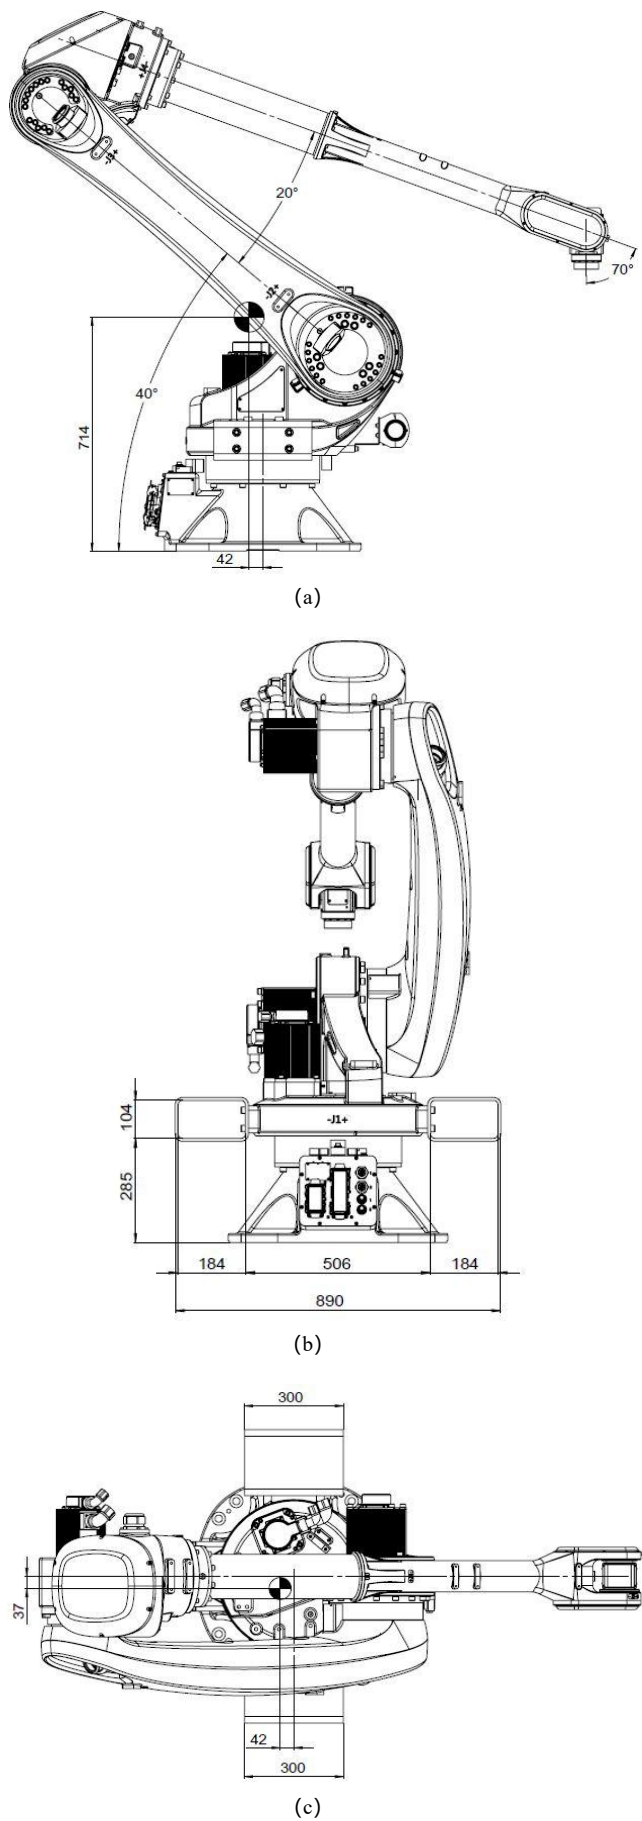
Dimensions of the manipulator for handling the RX3-A620-3100
